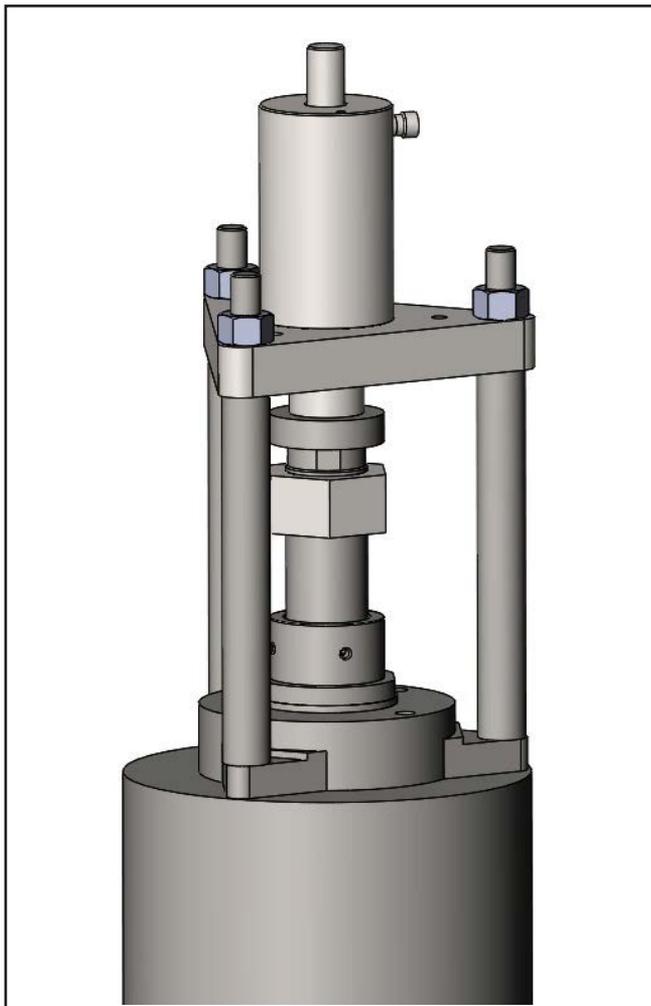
A: Hydraulic Set Device Layout for Set Pressure Adjustment
